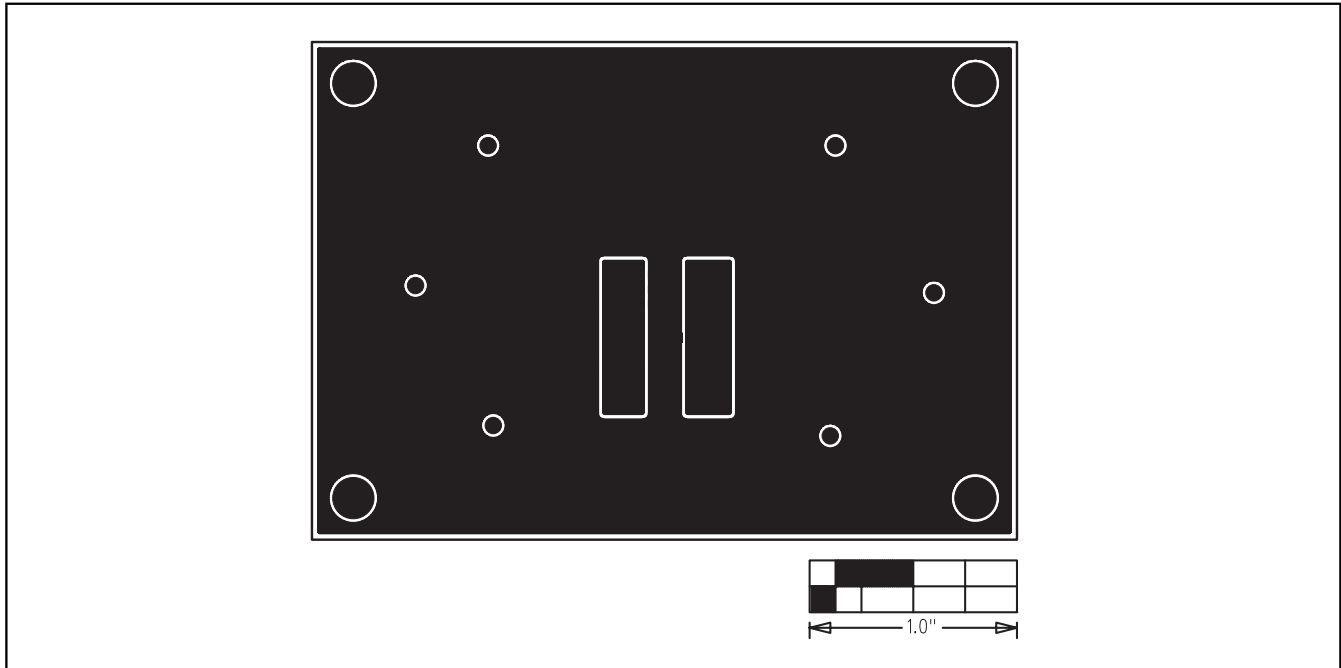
MAX9501 EV Kit PC Board Layout—Solder Side
